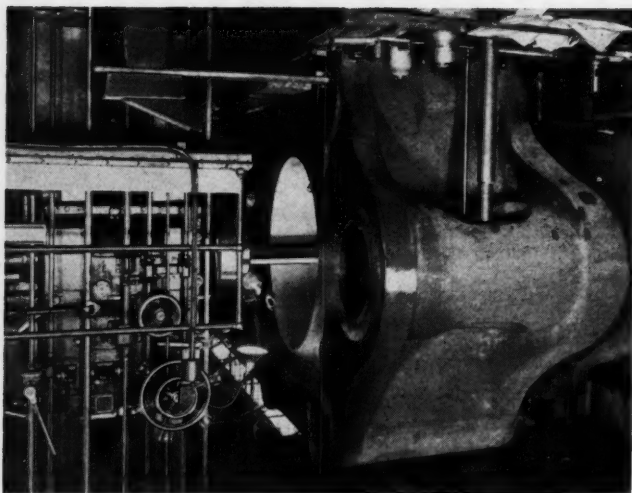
Boring cylinder for a 4,000-ton extrusion press. The casting weighed 200,000 lbs. and the finished bore is 39 in.
